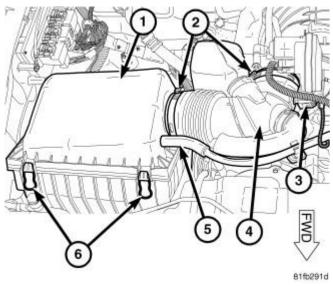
Air Filter Housing Courtesy of CHRYSLER LLC
